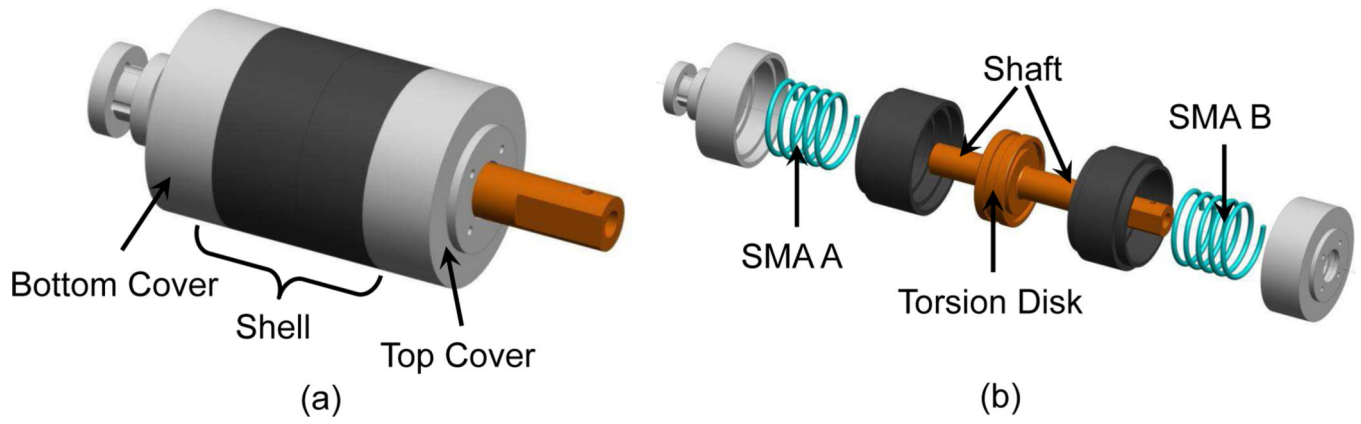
Mechanical design of the improved torsion actuator: (a) Assembly view and (b) Exploded view [22].
